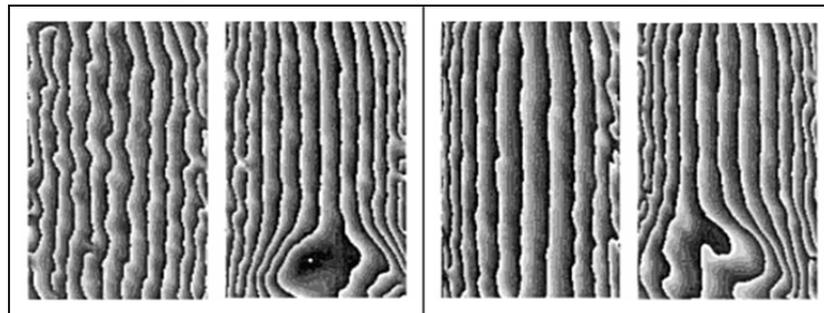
Shearographic investigation of two sintered tungsten-copper cylinders: undamaged specimen and one containing a sintering defect with front sides on the left and back sides on the right [584]
